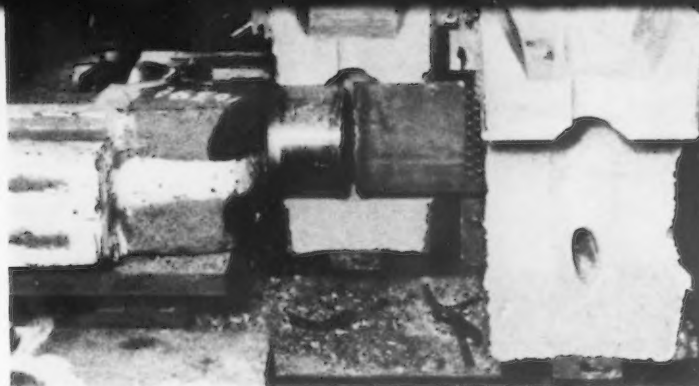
After the pattern is removed from the green sand mold, it is placed around the parts to be welded. The hole in the bottom of the half mold at right is where the metal feeds into the thermite cavity. Immediately above the weld location is a riser.
